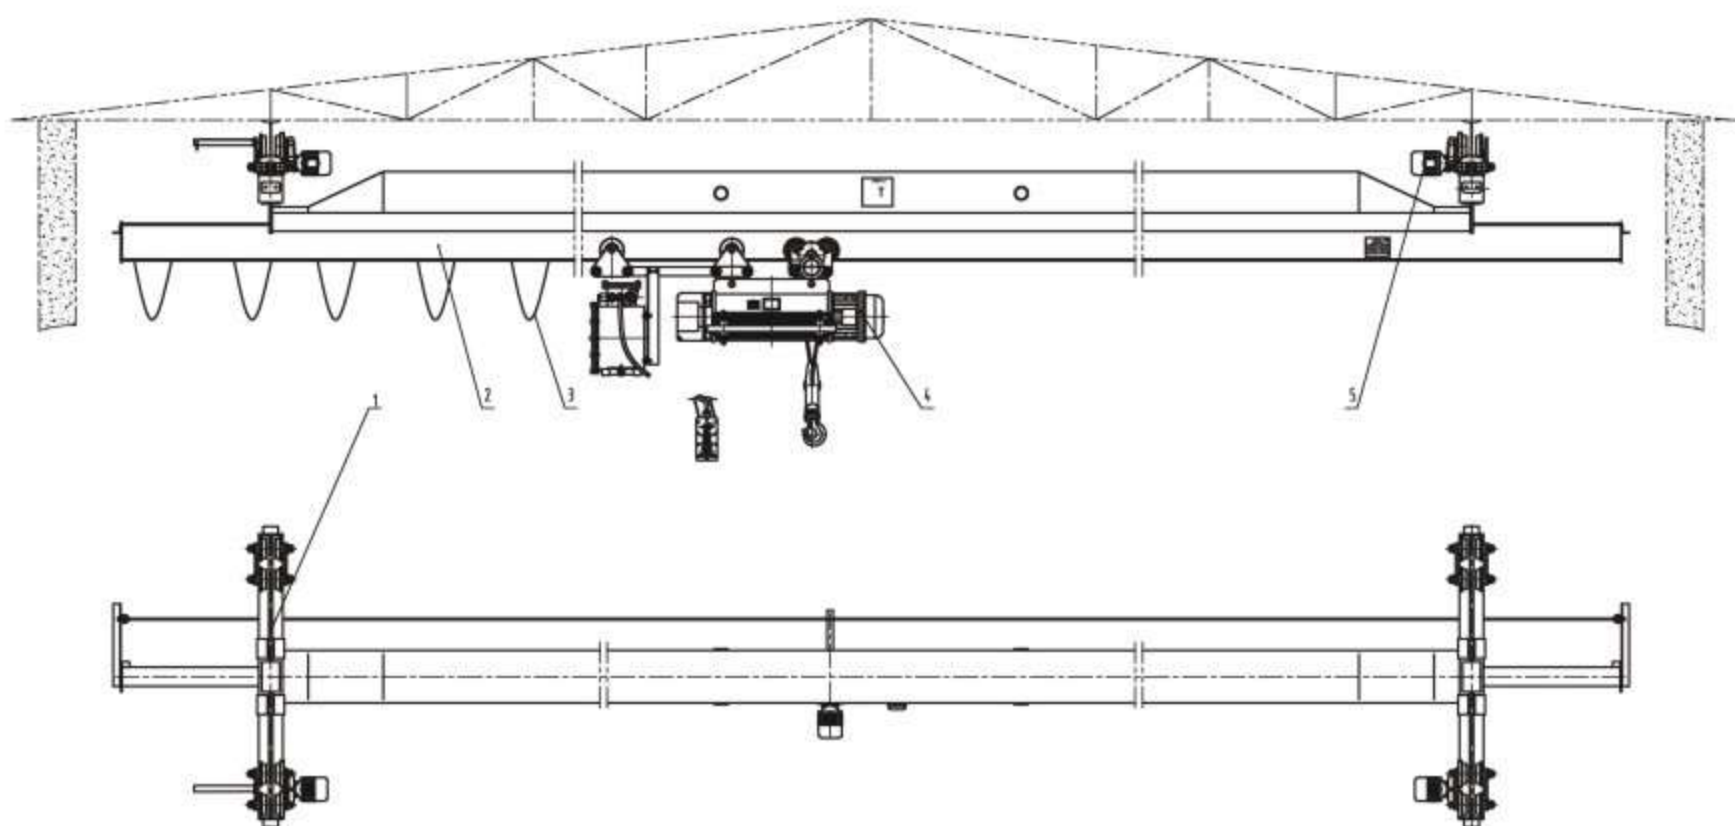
LXB-type explosion-proof electric single girder Under slung crane
